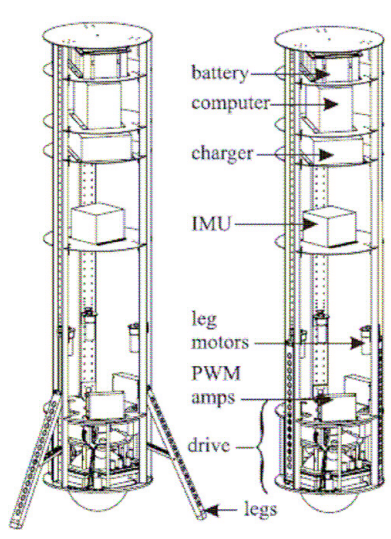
Ballbot with kickstands deployed (L) and balancing on the single wheel (R) [61].
